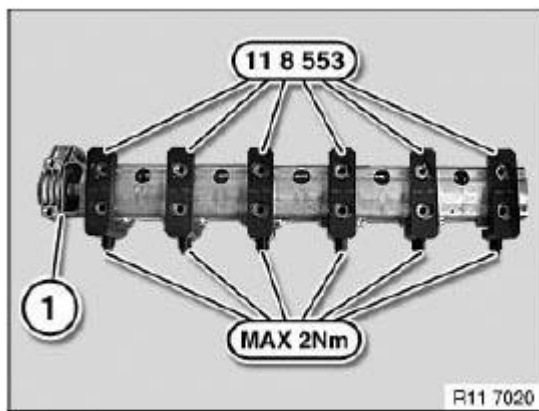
Identifying Upper And Lower Bearing Strips With Special Tools (11 8 553)
